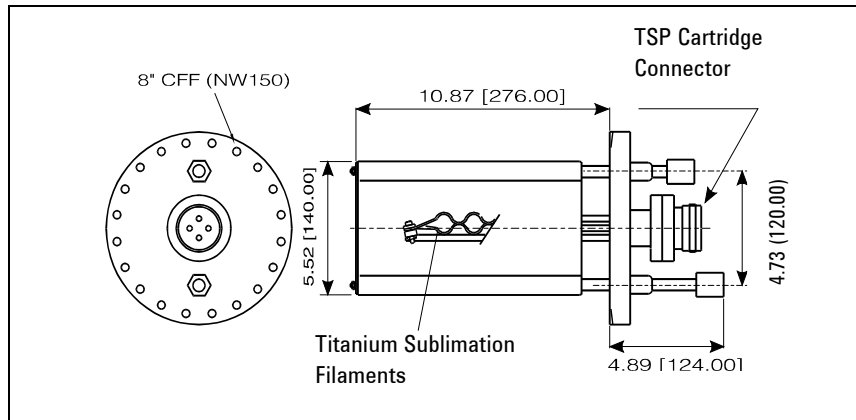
TSP Cryopanel Outline Drawing in mm [Inches]
